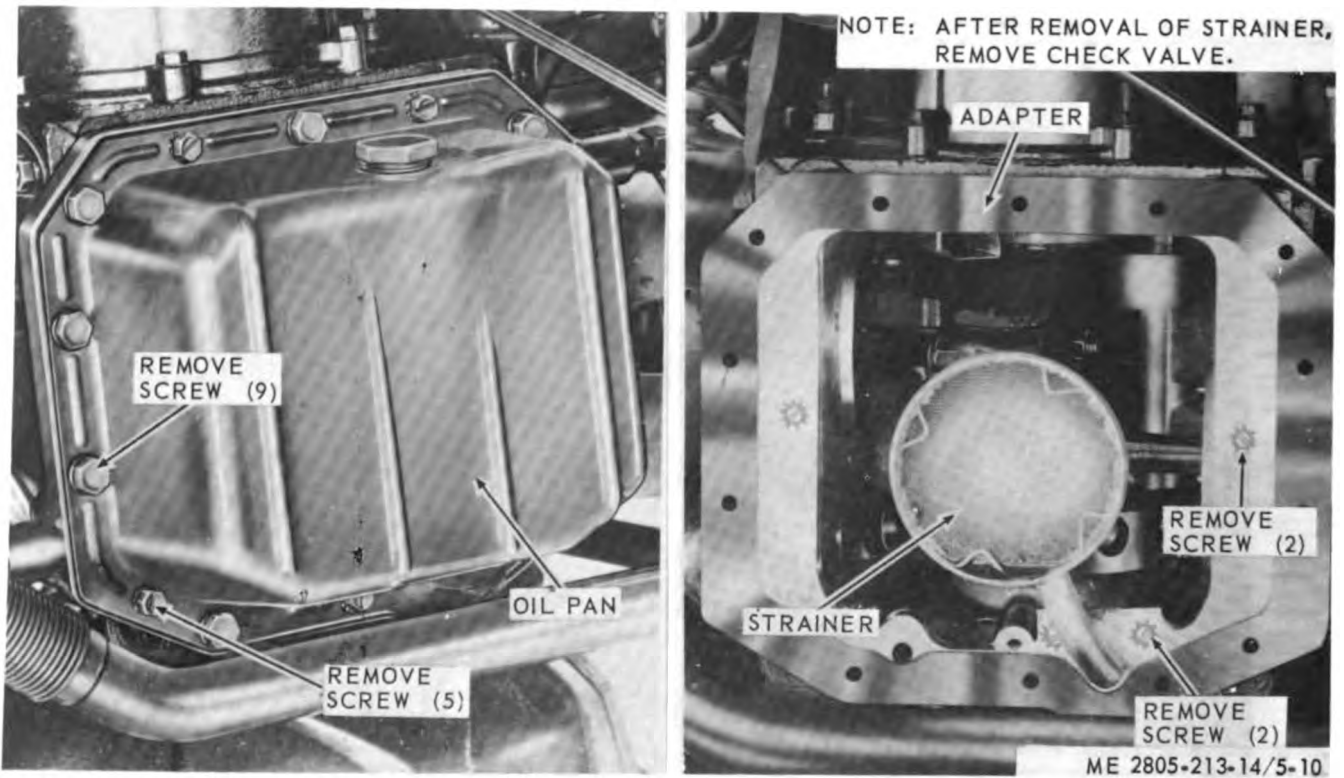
Oil pan, oil pan adapter, strainer, and check valve, removal and installation.
